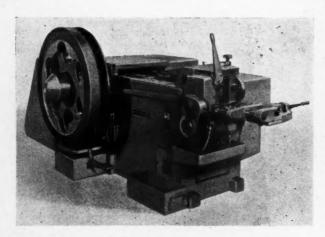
Hatebur type PKE-10 machine for cold pre-forming operations on blanks for hexagon nuts
